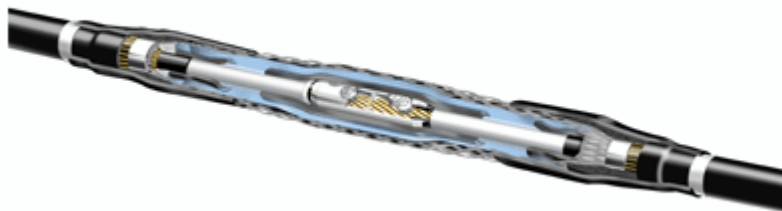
Cross-sectioned cold shrink joint for one core cable with mechanical connector (Ensto, CJ11.2403C, 2023).
